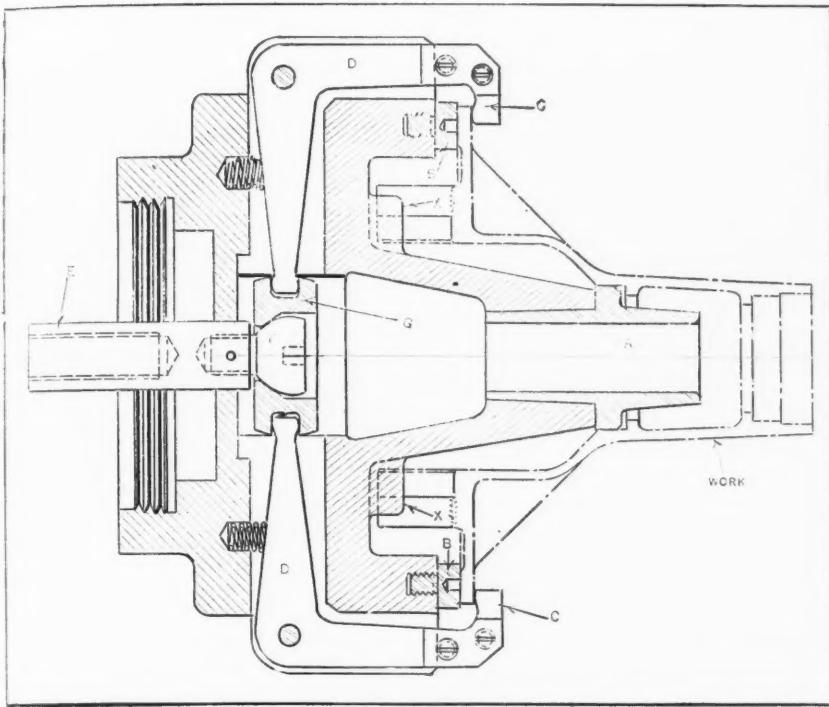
Chuck Employed for Holding the Rear-axle Housing in the Second Operation
